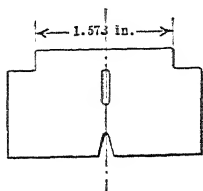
GAGE FOR CHECKING SPAN AND LOCATING KNIFE OF PENDULUM AND NOTCH OF SPECIMEN.
